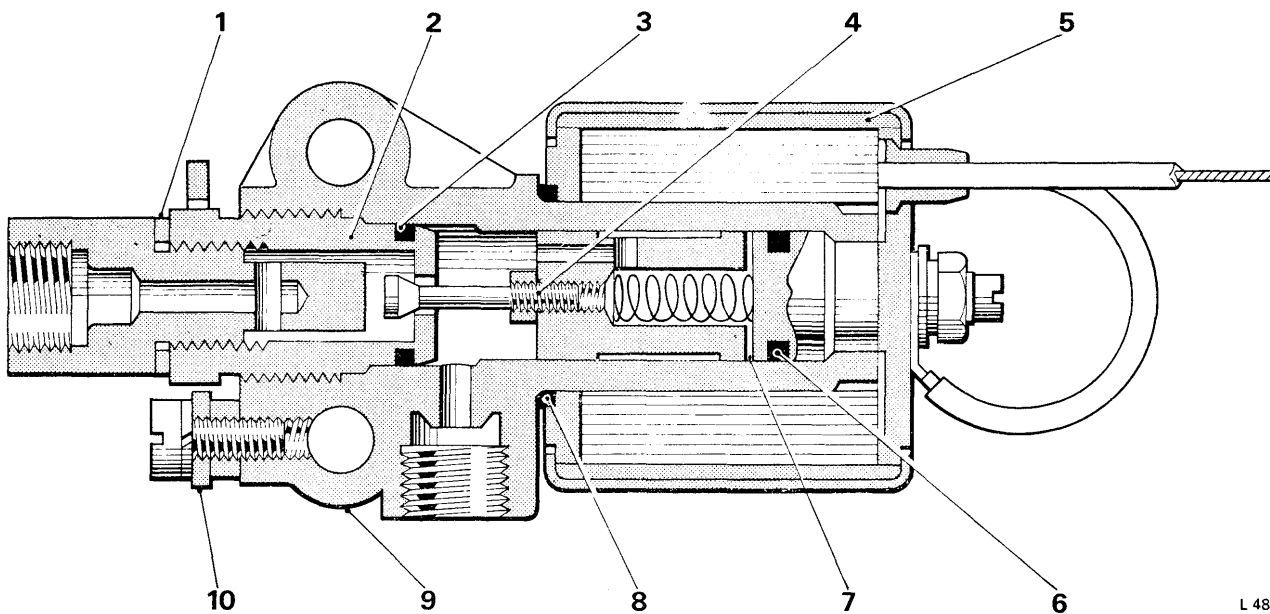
SECTIONAL VIEW OF A SOLENOID VALVE
